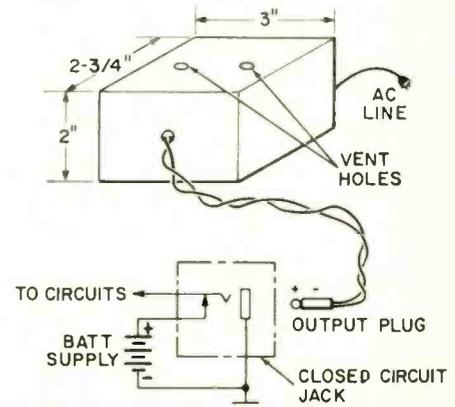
POWER SUPPLY HOUSING and method of connecting supply to the load.
